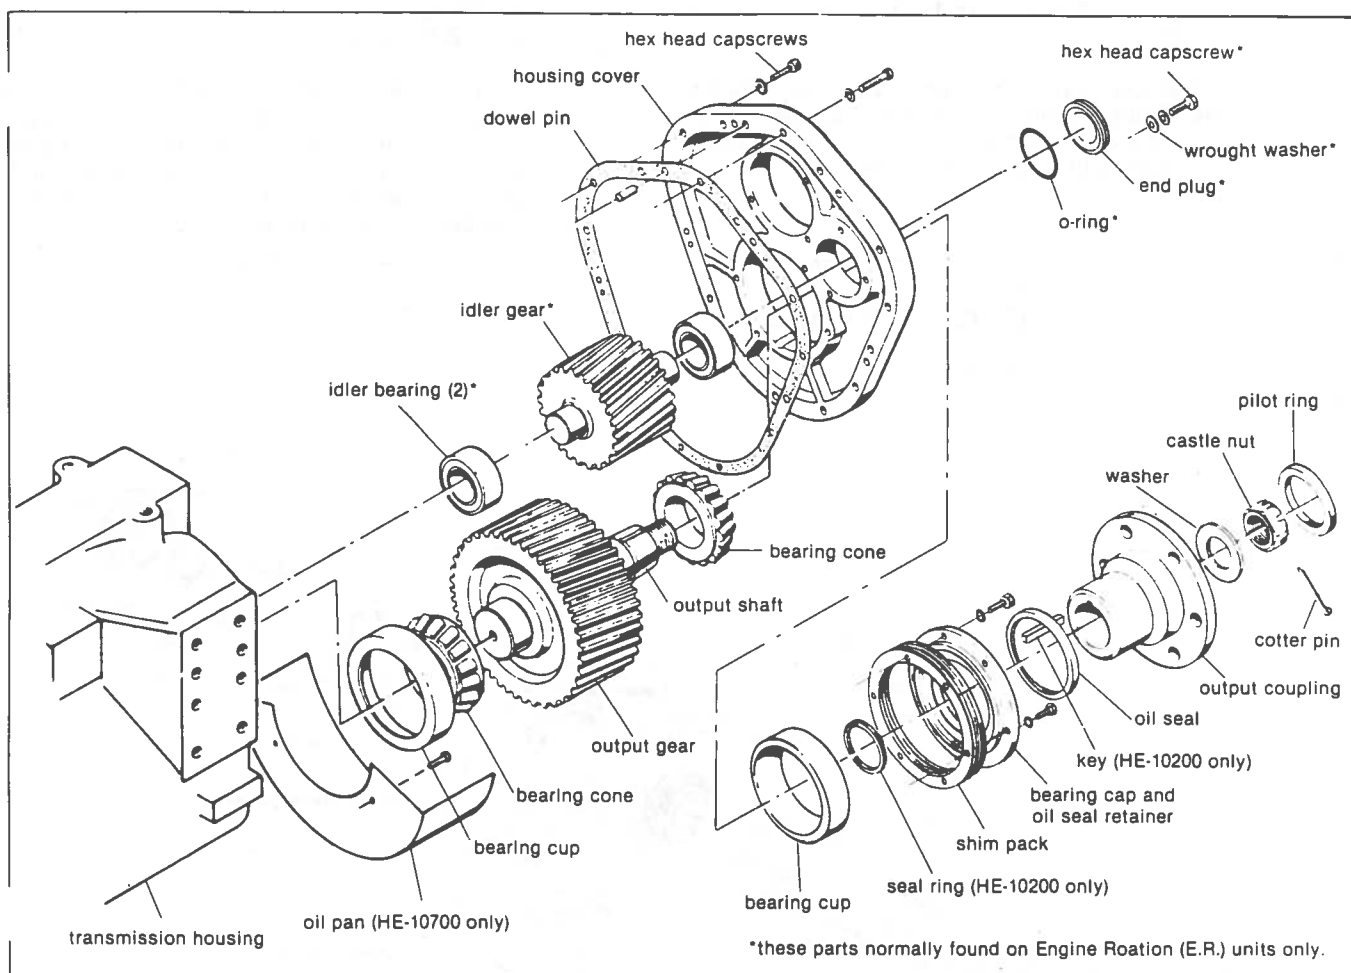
Output Gear, Idler Gear, Cover and Related Parts.
